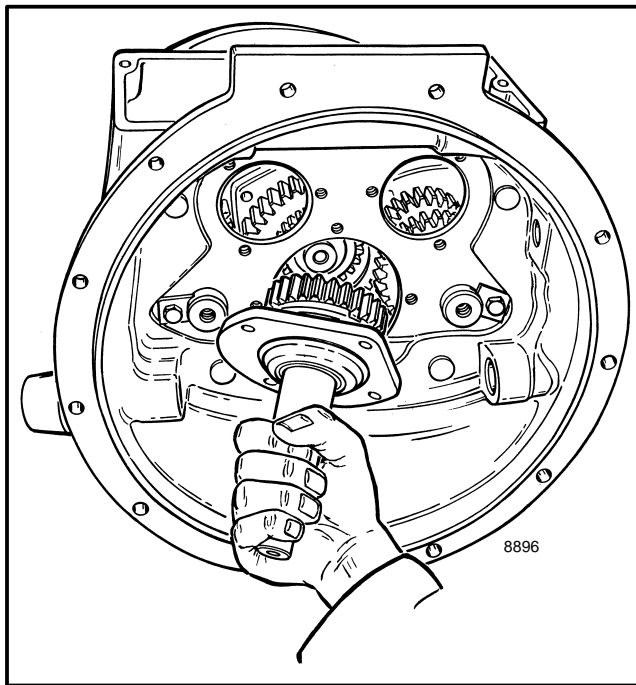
REMOVE THE INPUT SHAFT AND BEARING RETAINER
